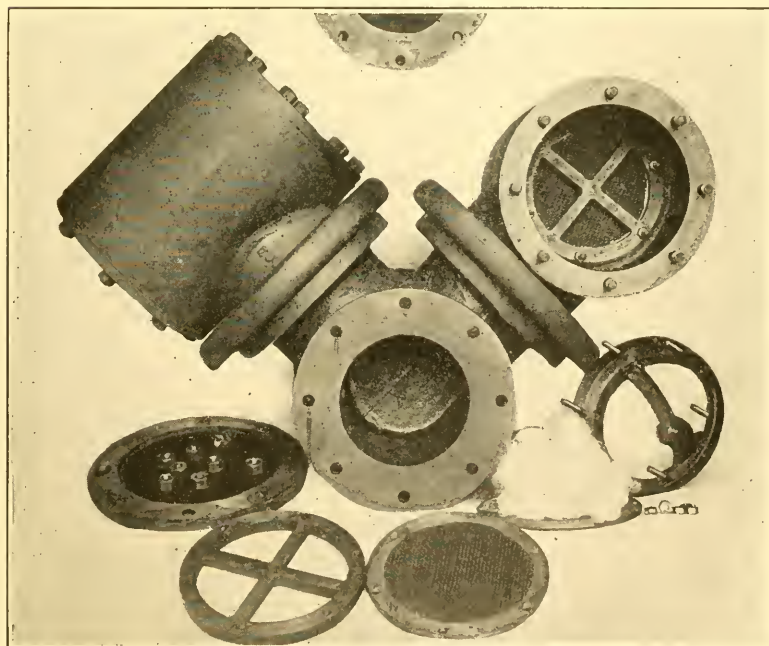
VIEW SHOWING VARIOUS PARTS OF COMMERCIAL EXTRACTOR
